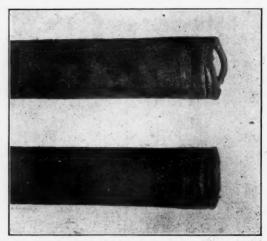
Rolled and Beaded Boiler Tubes Pulled from Sheet.
